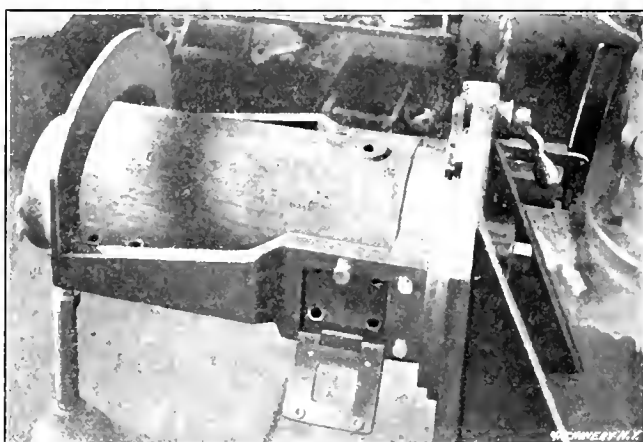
Cylinder Mounted in Indexing Jig in which the Various Holes are drilled and tapped
